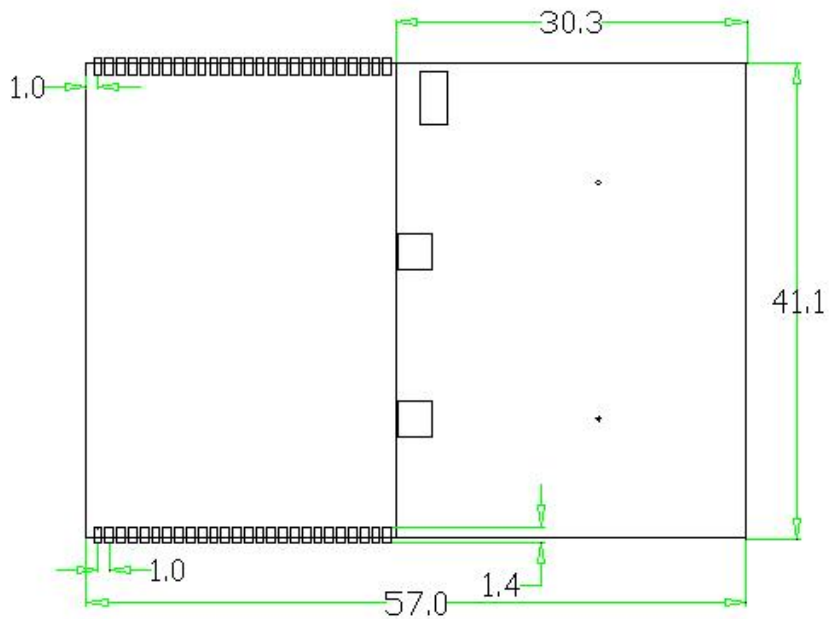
SKU611 Module Land Pattern (units: mm)
